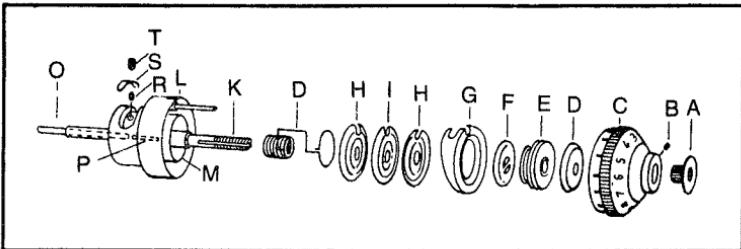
The top tension mechanism on Pfaff Models 262 and 362. It is important when installing the assembled unit on the machine that the tension releasing pin (P) enters the hollow tension stud (K). A. Tension nut; B. Set screw; C. Tension dial; D. Thrust washer; E. Spring assembly; F. Tension release washer; G. Thread guide; H. Tension disc; I. Central tension disc; J. Thread check spring; K. Tension stud; L. Tension barrel; M. Tension bushing; O. Tension release plunger; P. Tension release pin; R. Set screw; S. Cap; and T. Set screw.
